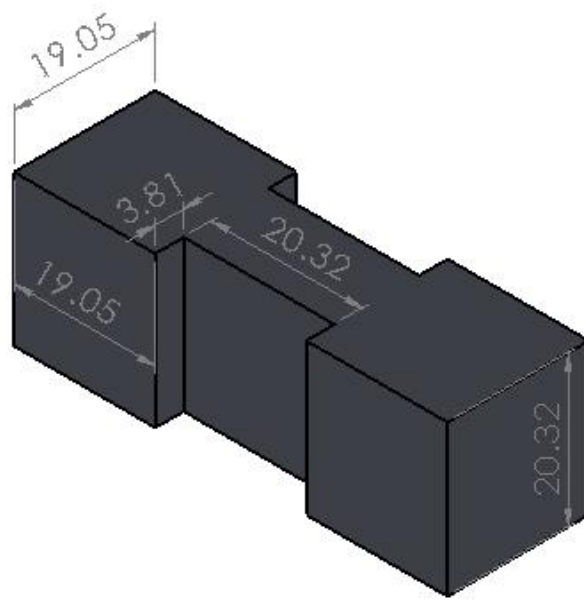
Dimensions of specimens for density measurement test using modifying parameter
